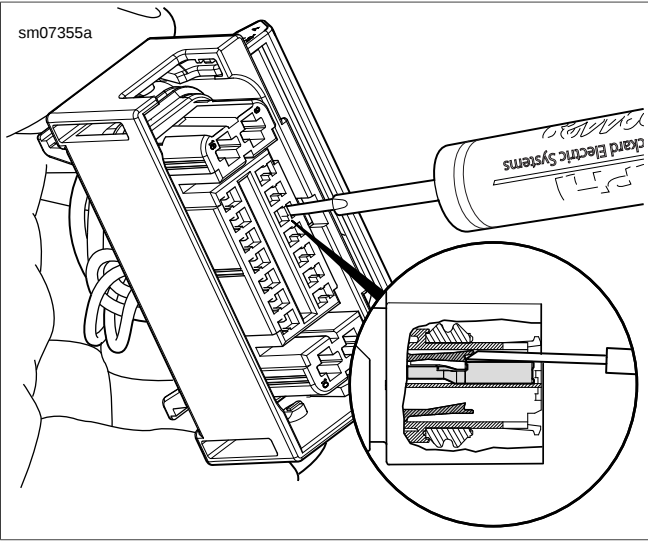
Removing Small Socket Terminal: Tyco MCP Connector
